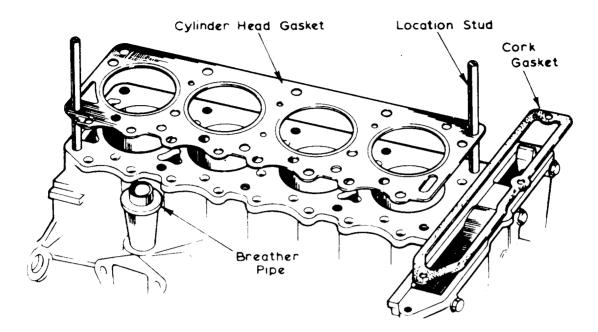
CYLINDER HEAD LOCATION STUDS & GASKETS.
